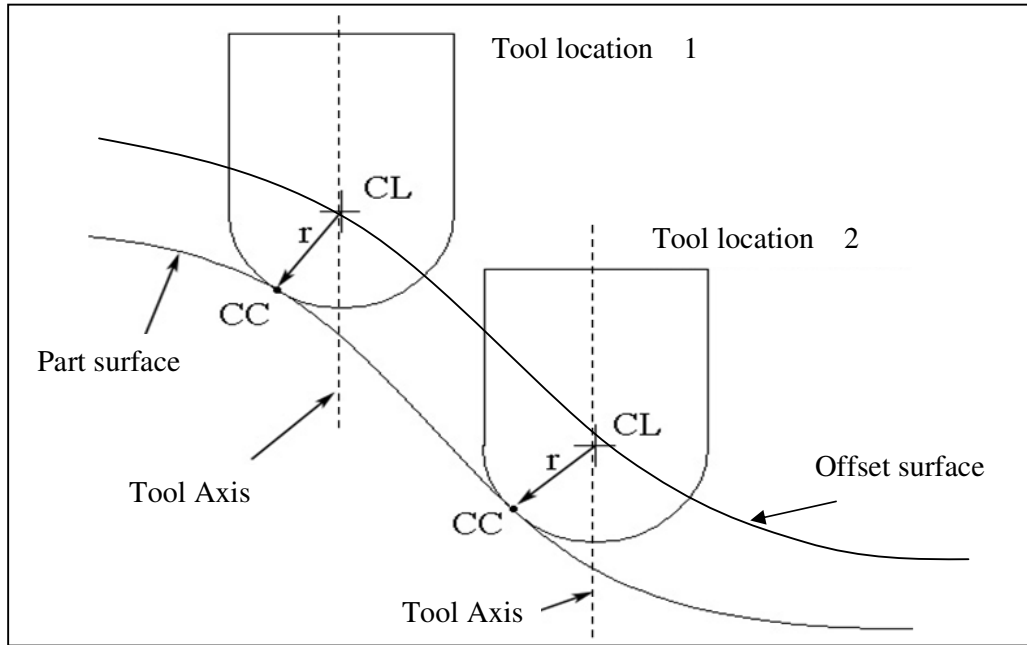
3 Axis NC Milling Lathe Machining Coordinates
